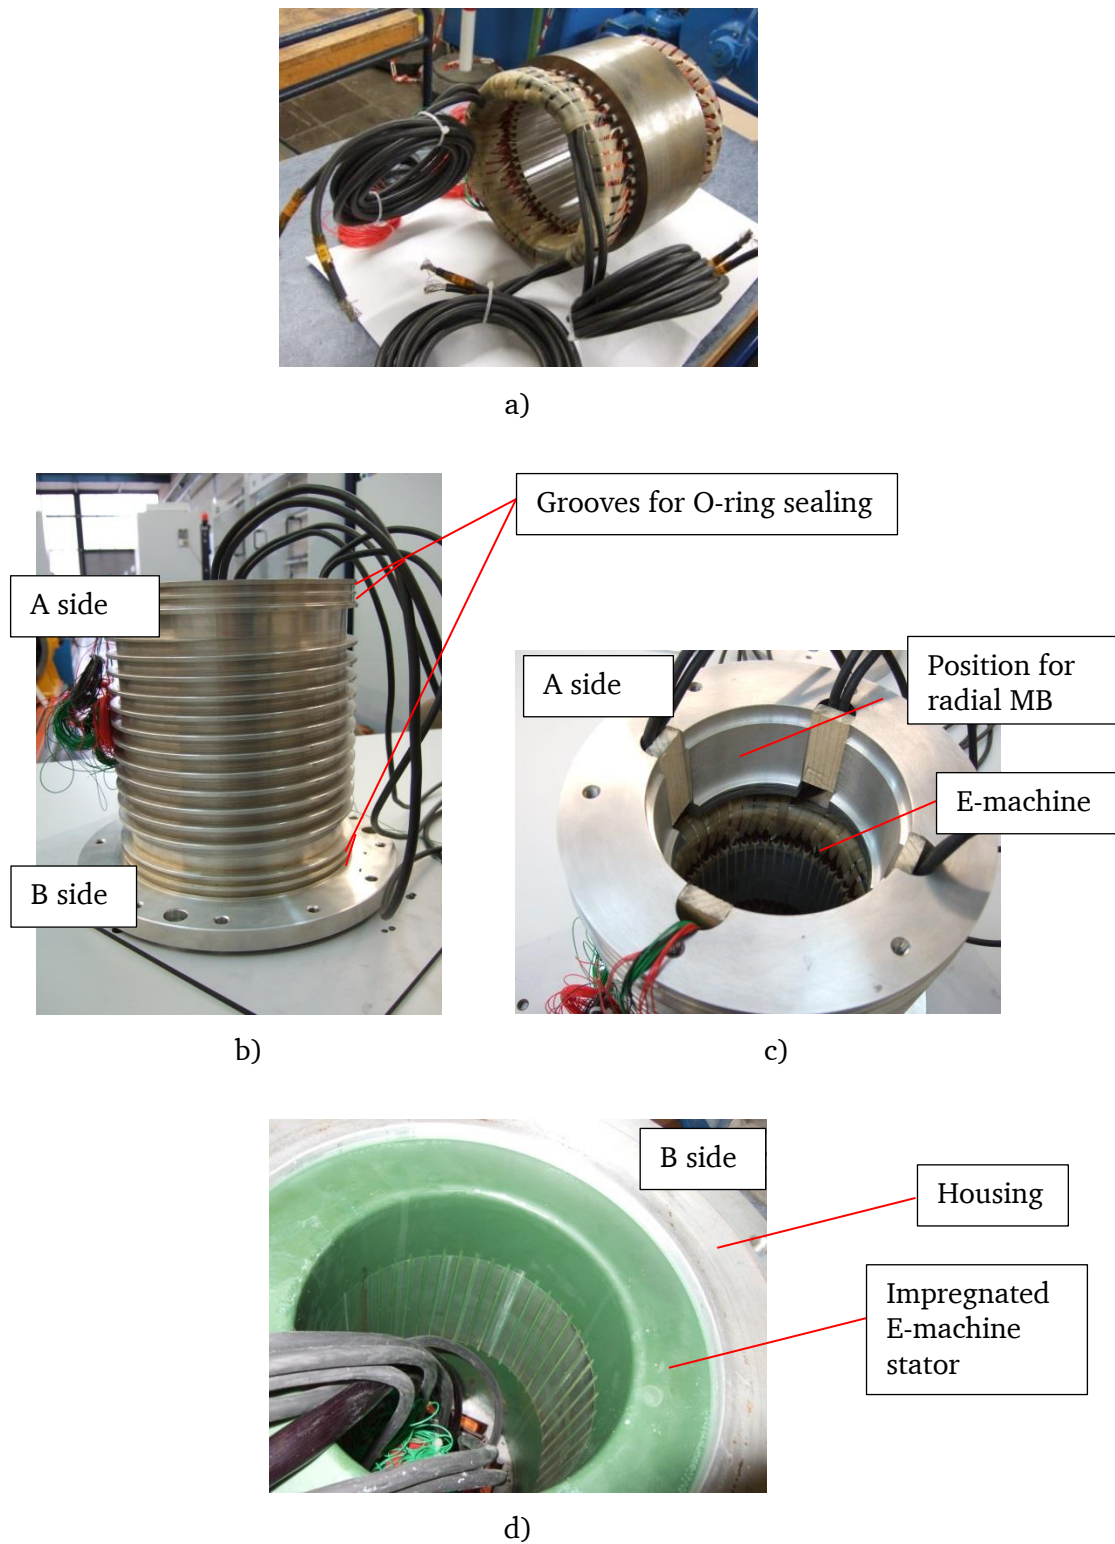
Components of upper housing: a) E-machine stator, b) upper housing with spiral cooling jackets, c) top view of the upper housing with E-machine (before impregnation), d) bottom view of the upper housing with impregnated E-machine stator
